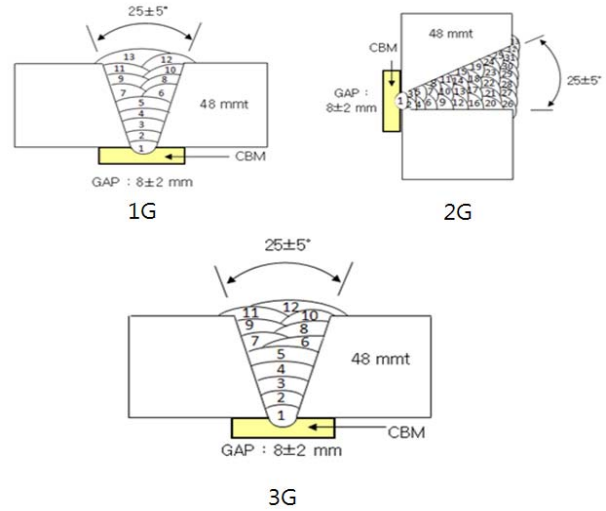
Section view of weld metal (DH36, EH36) 48t
